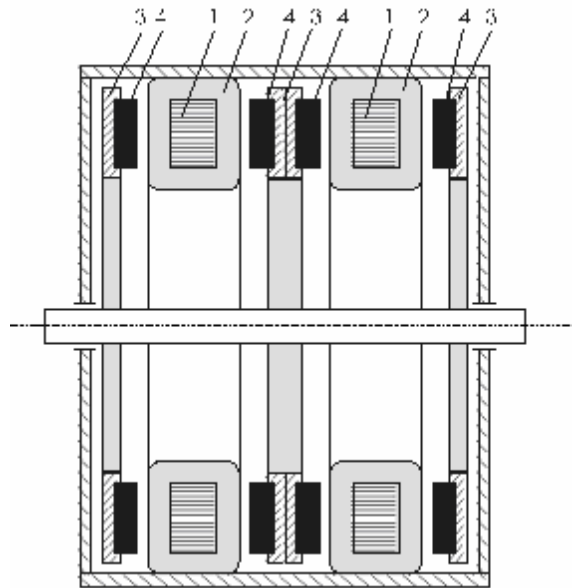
Multi-disc AFPM machine: 1-stator core, 2-stator winding, 3-rotor, 4-magnets [43]
